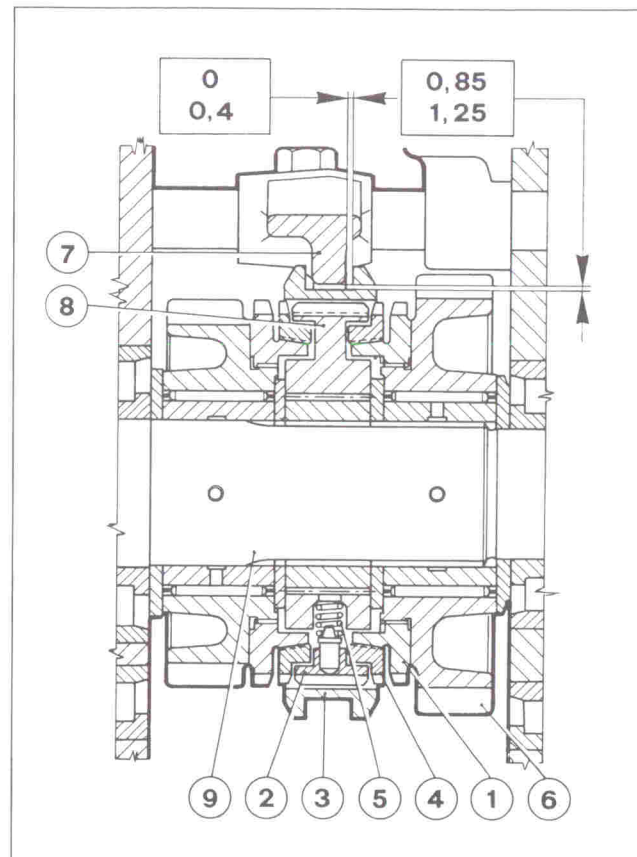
1st speed and reverse synchronizer and gear assembly.
